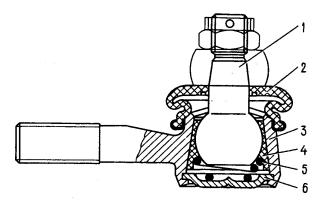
Steering Rod Ball Joint, Sectionalized: 1 - ball pin; 2 - boot; 3 - joint body; 4 - seat; 5 - spring; 6 - plug
